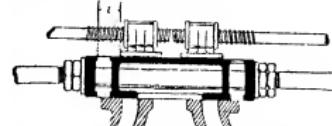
Expansion-Valve on back of Main Slide-Valve.
